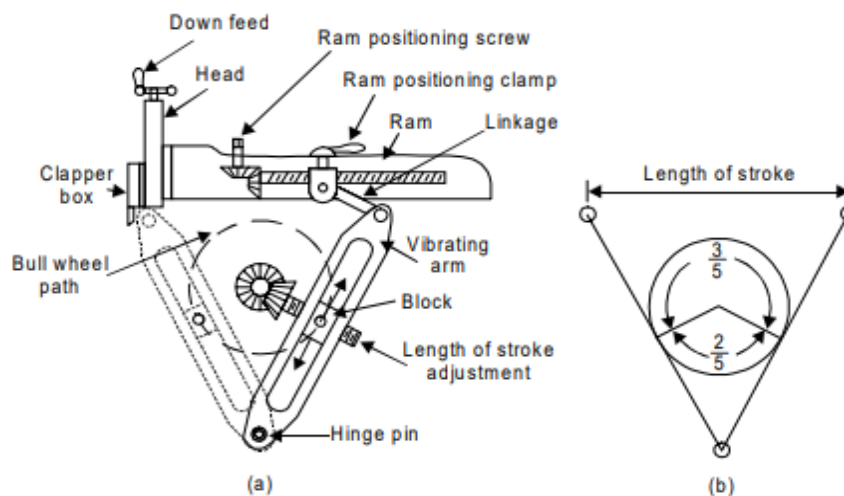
Shows Crank and Slotted Link Mechanism(wordpress.com).
